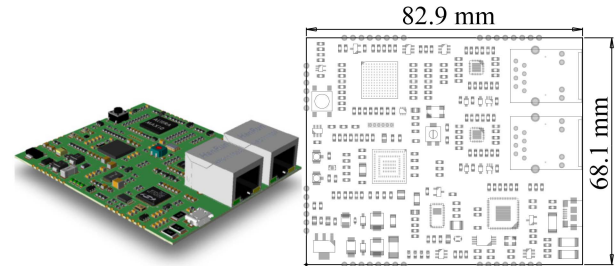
IIoT module prototype (left) and IIoT module PCB layout (right).
